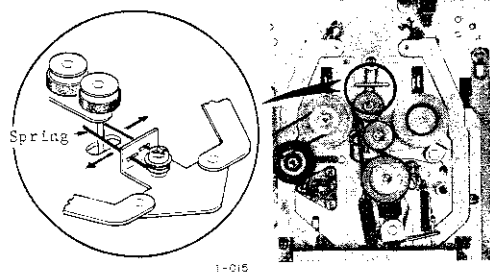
F.FWD and Rewind Take-up Measurement
